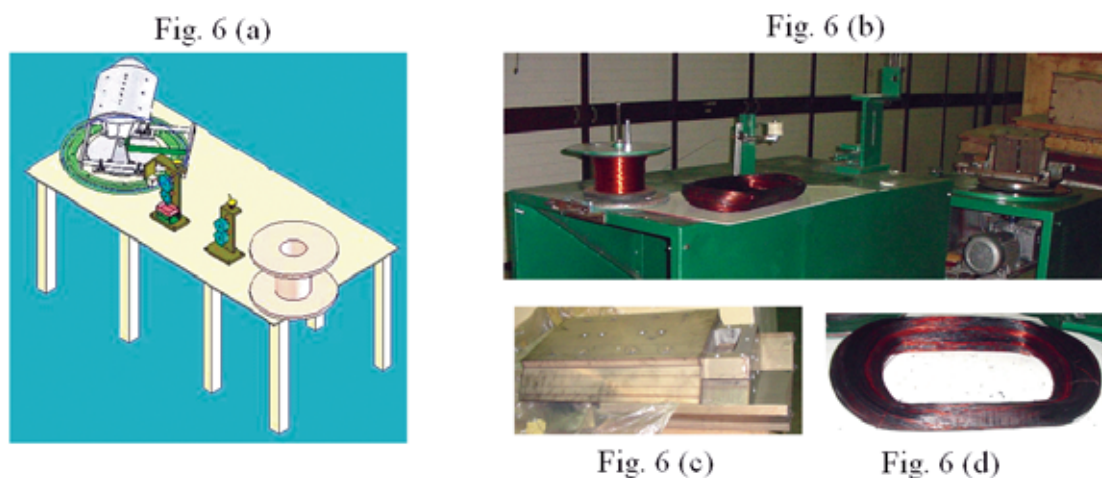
(a) Design and (b) actual wire winding machine for superconducting Q1-Q2 coils along with (c) aluminum former and (d) the epoxy coated copper coil
